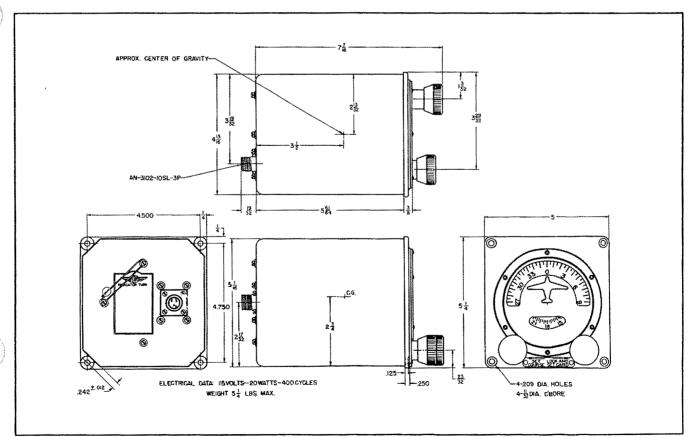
Outline Drawing (AF Type C-1 Indicator, Sperry Part No. 657069)
